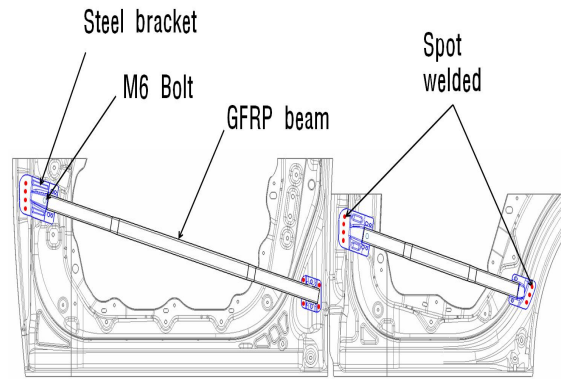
Shape and mounting configuration of the side-door composite impact beams
